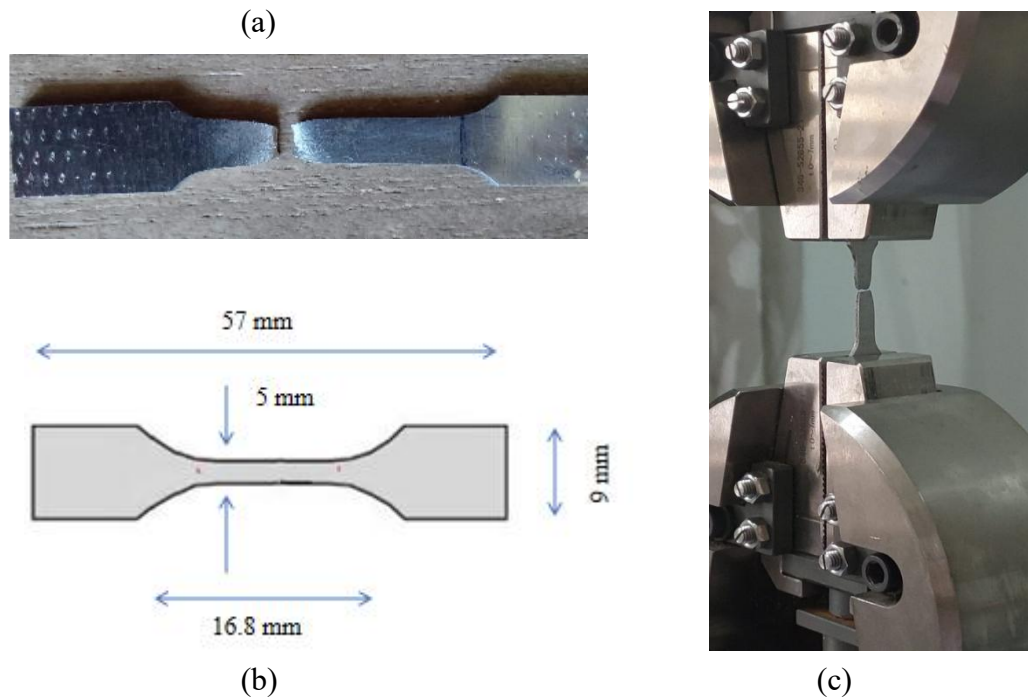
Tensile test specimen (a) dimensions of the specimen, (b) fractured specimen with cup and cone fracture, (c) specimen under load in UTM
